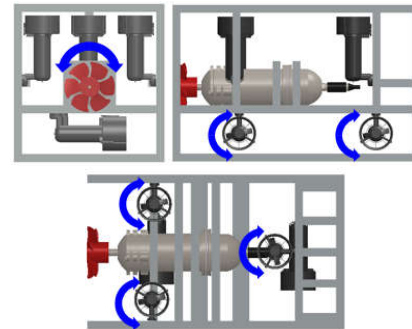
Thrusters arrangement in back view, side view and top view respectively.
